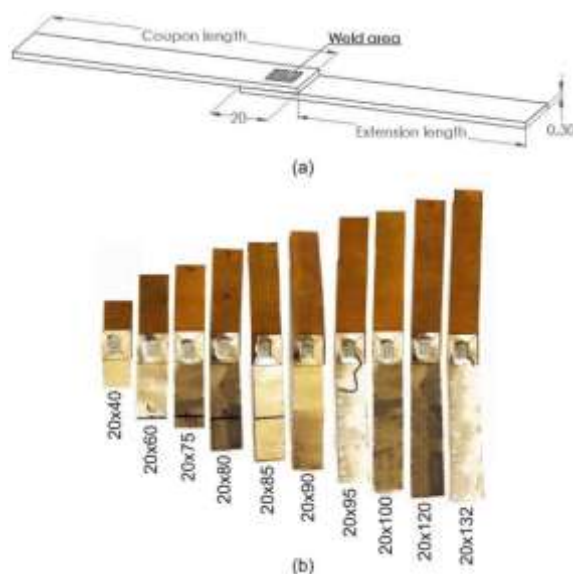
(a) Schematic diagram showing extension length, (b) lap welded samples of different dimensions
